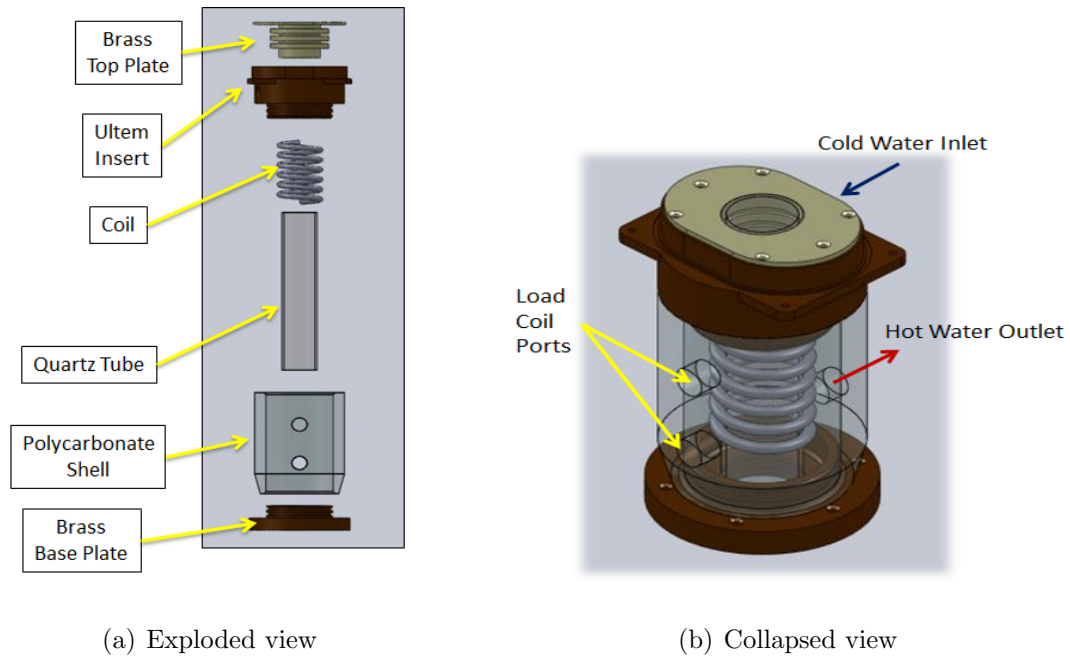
The water cooled injection assembly showing the components on the left and the in/out ports on the right.
